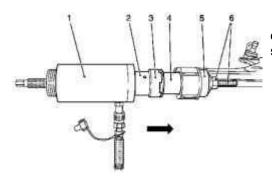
Mounting the rear damping sleeve: 1, 2, 3, 5, 6 - a special tool, 4 - damping bush
